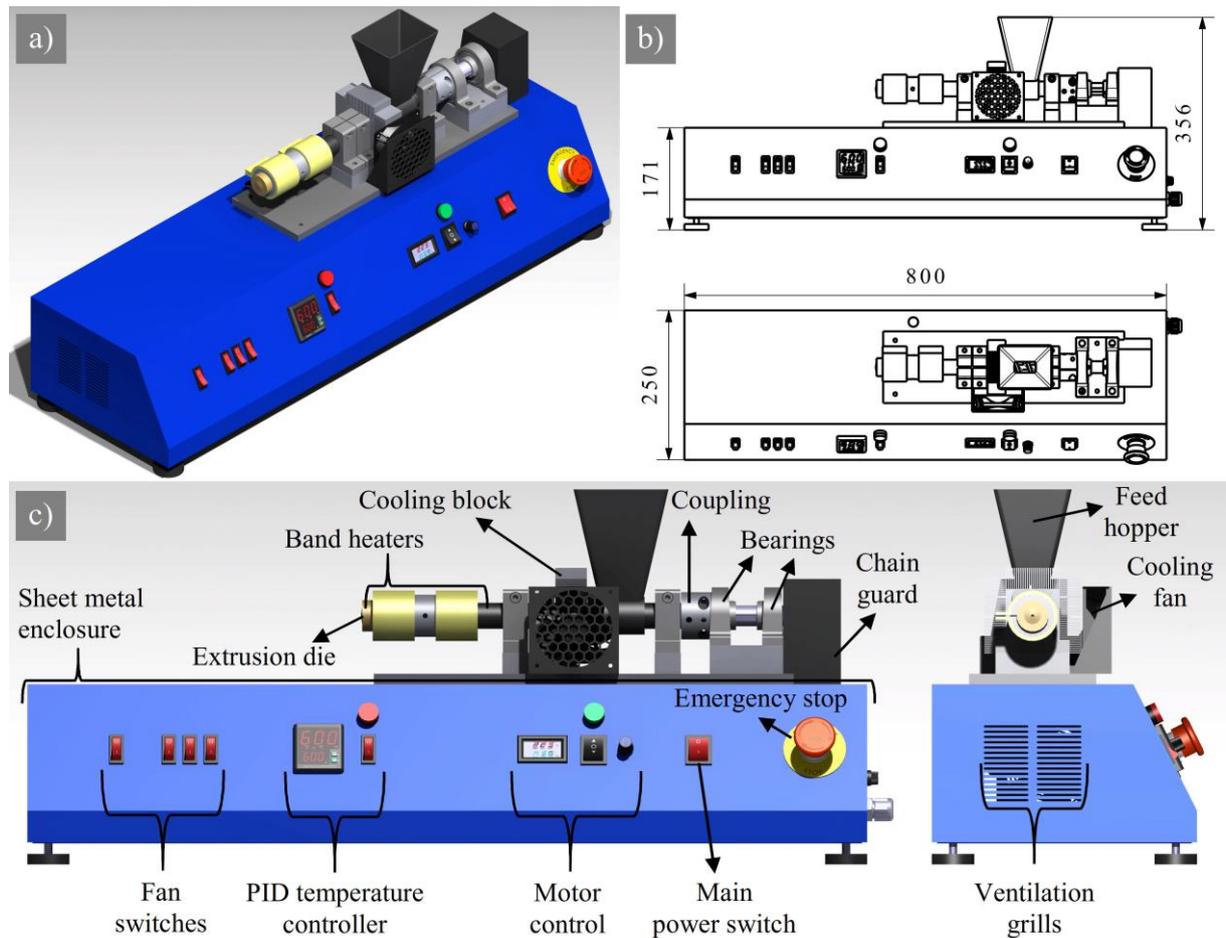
Extruder design details *a)* an overall view of the CAD model, *b)* technical drawing for major dimensions, and *c)* components' names
